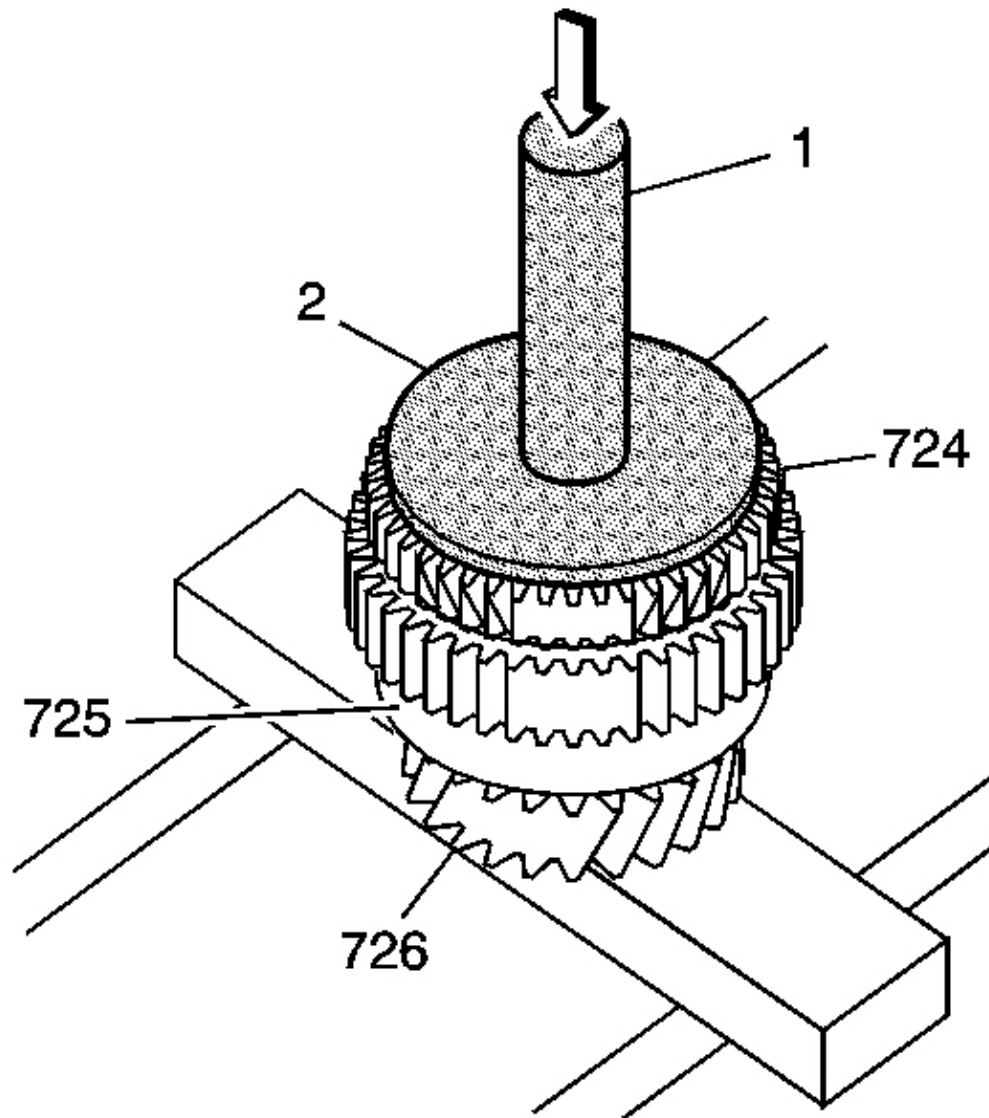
Installing The 1st Coast Clutch Hub & 1st Drive Gear Using EN 46342, DT 46516 & A Hydraulic Press
